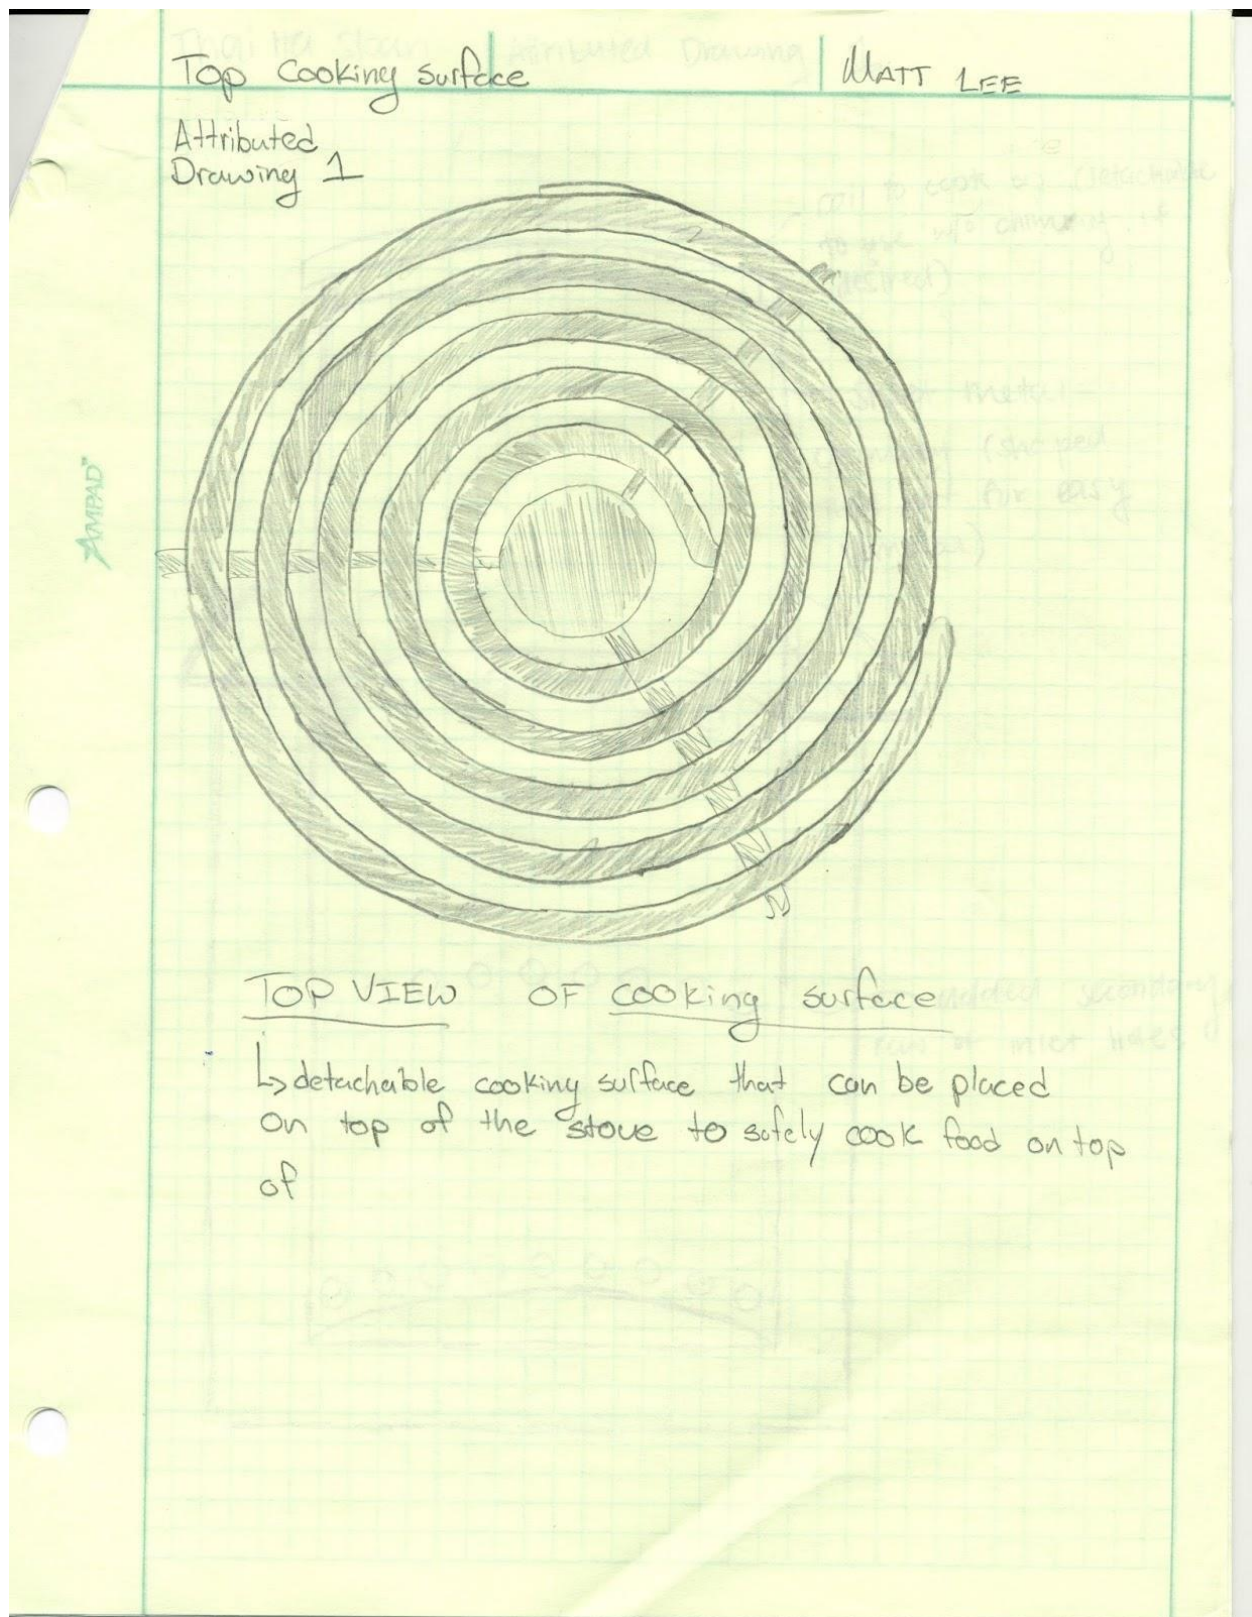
Initial Cooking Surface attributed drawing - Matthew Lee.
